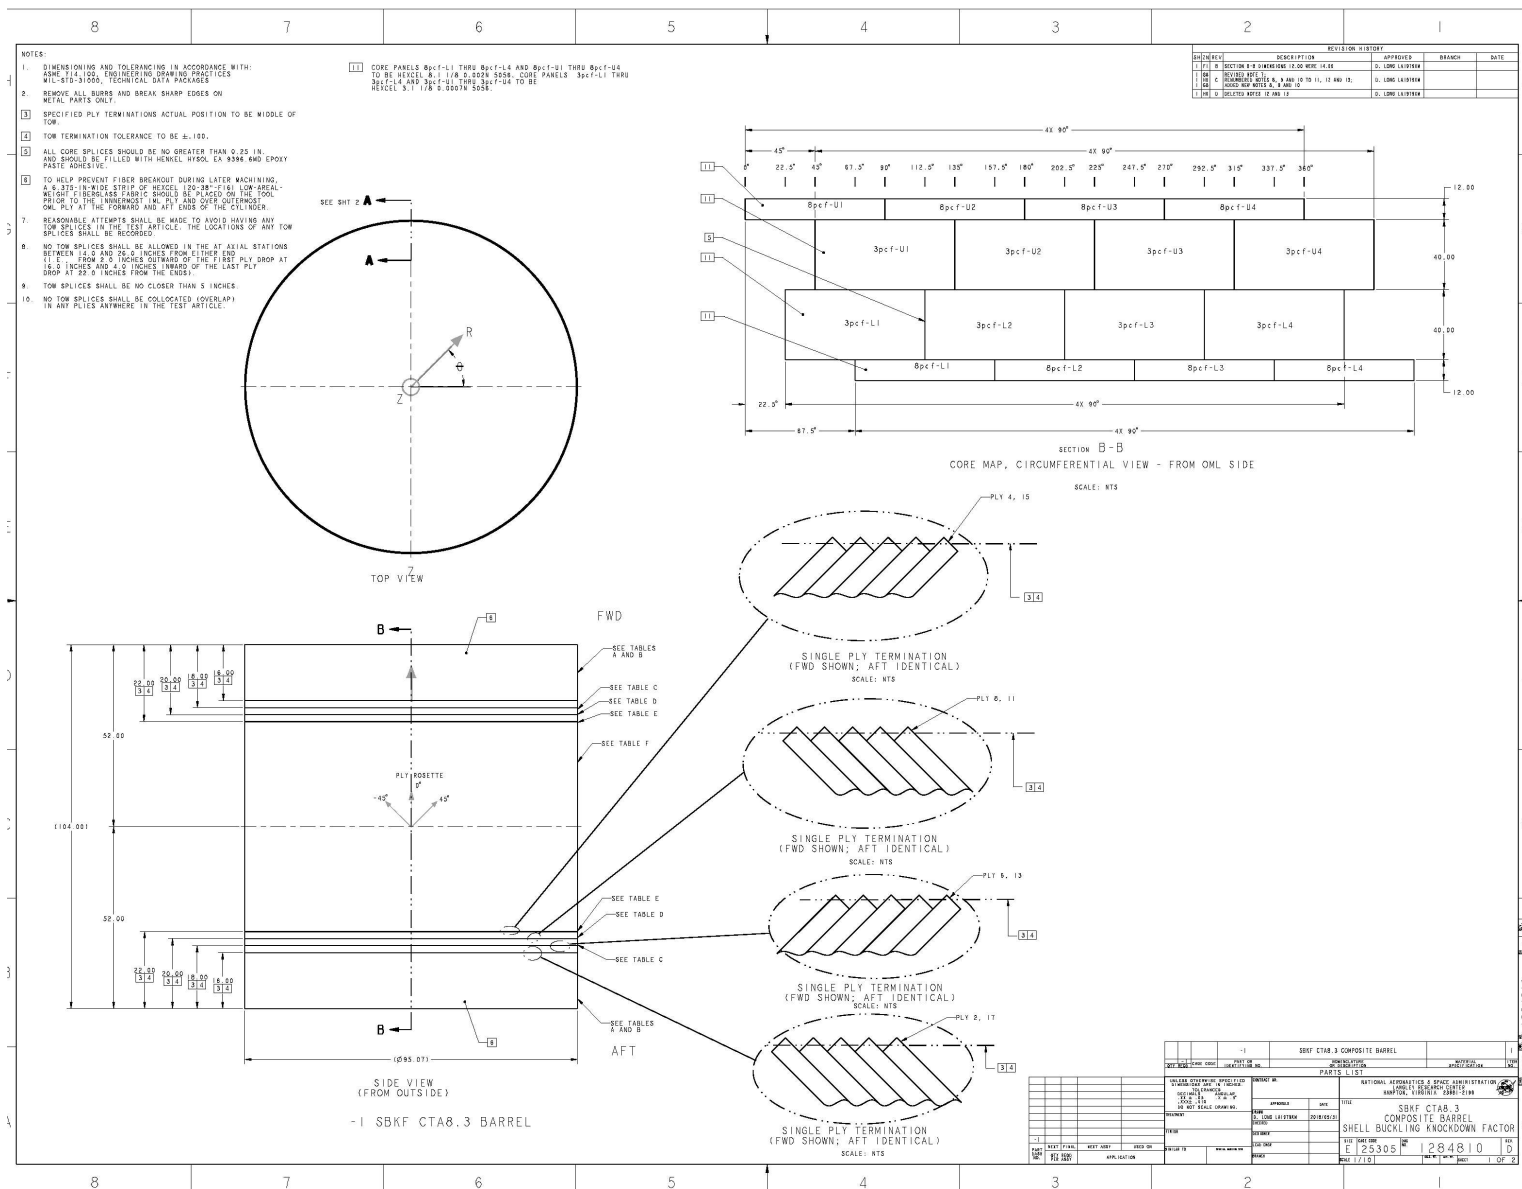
CTA8.3 fabrication drawing, LaRC Drawing 1284810 Rev. D.
